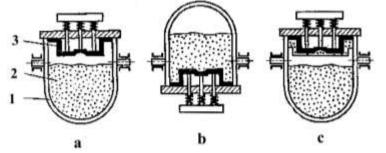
Shell making process: a - initial position; b - shell formation; c - a shell on the pattern and pattern plate; 1 - box; 2 - sand-resin mixture; 3 - pattern
